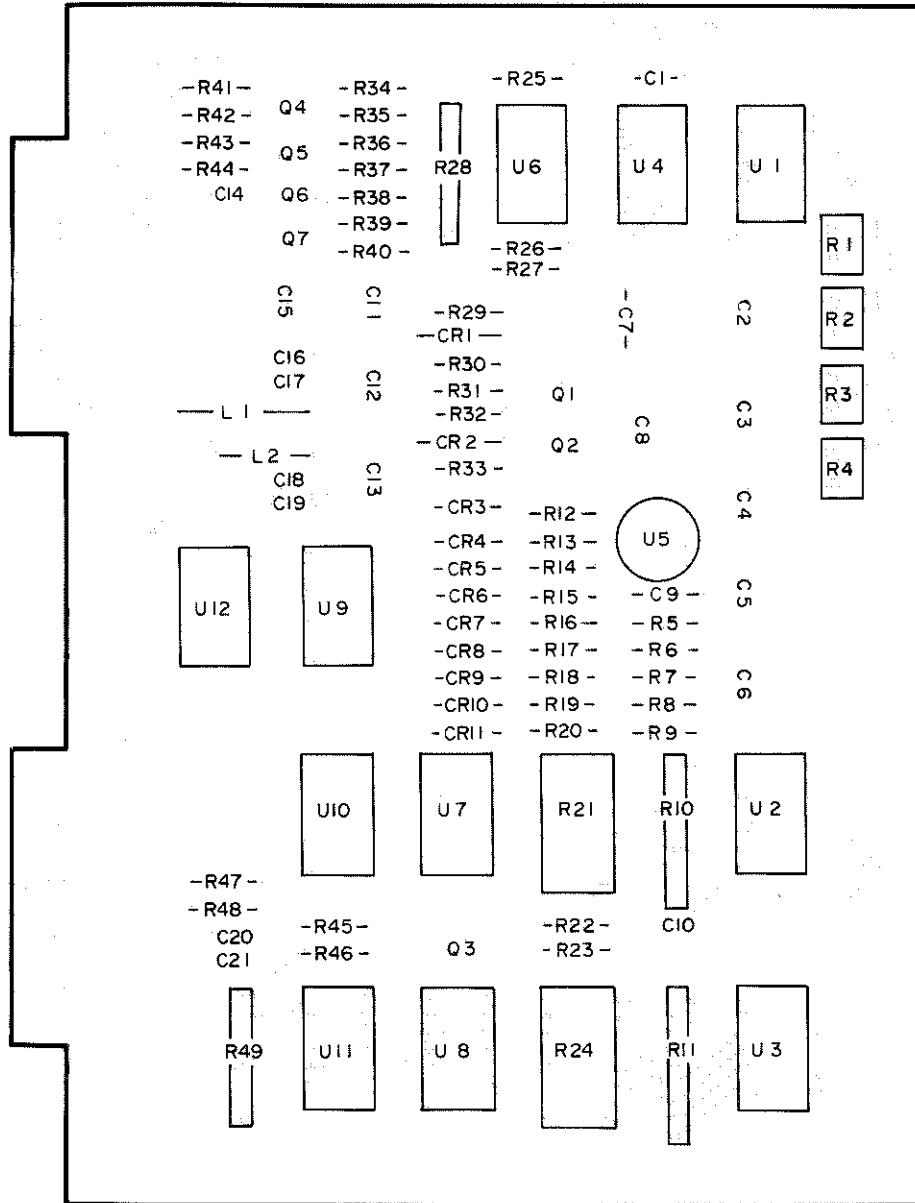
A4 Programmable Switch Control Driver Board Assembly Component Locations.
